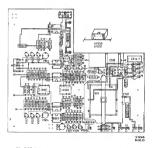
Galvanic separation p.c.b., lay-out, conductor side
